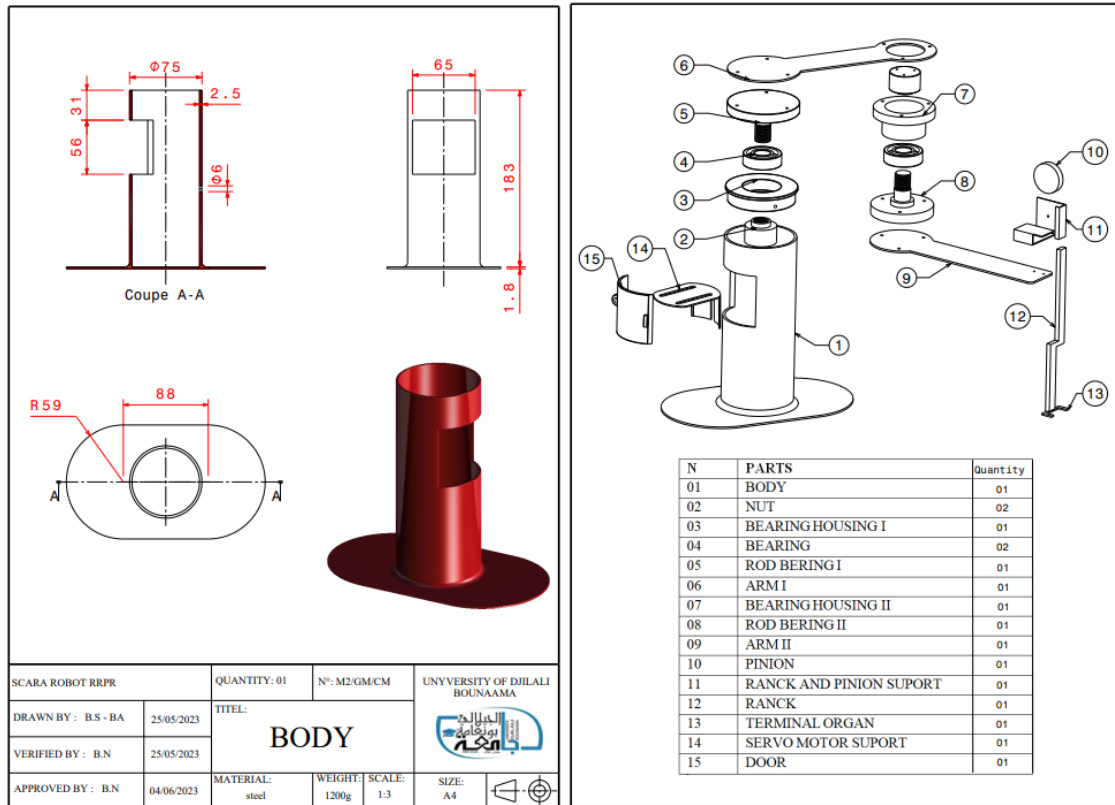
Body drafting and exploded view drawing (Drafting of all parts in appendix)
